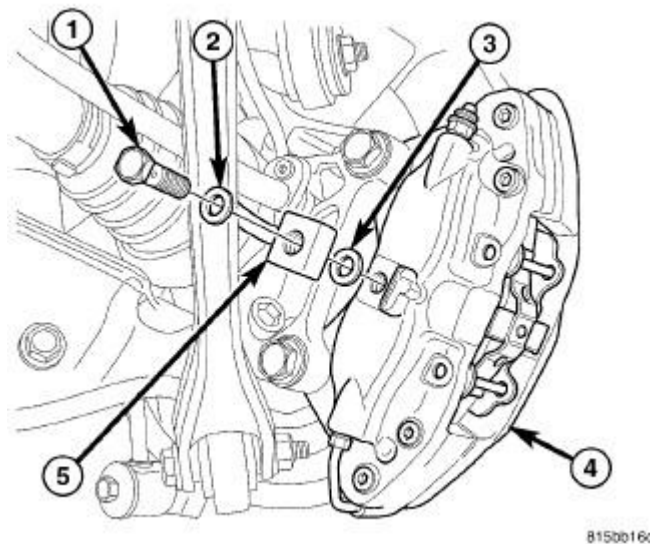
REAR FLEX HOSE CONNECTION - SRT8
